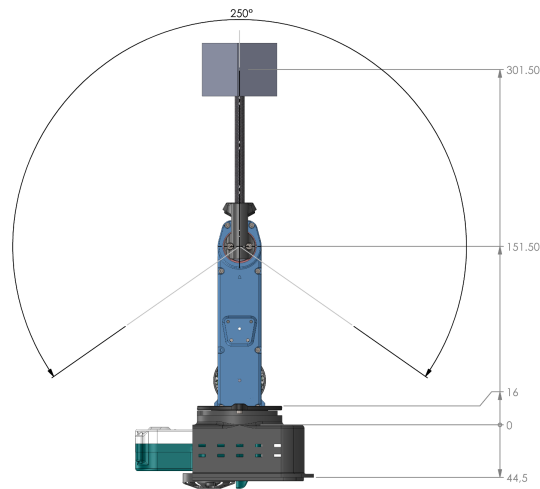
A technical drawing of the manipulator, dimensions are given in mm.
